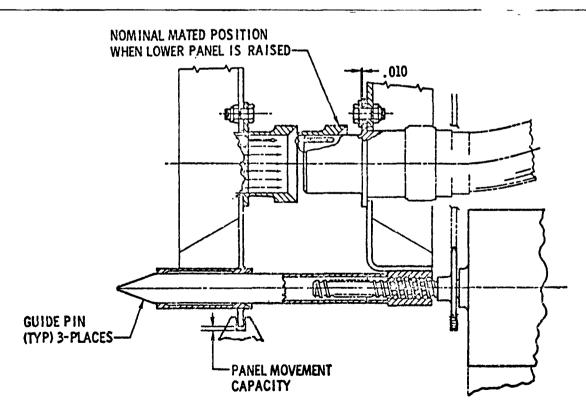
ELECTRICAL PANEL ASSEMBLY
